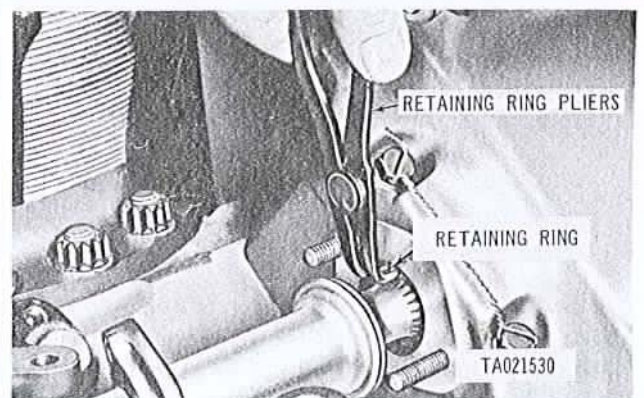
Removing or installing horizontal fan drive shaft retaining ring using ring pliers.
